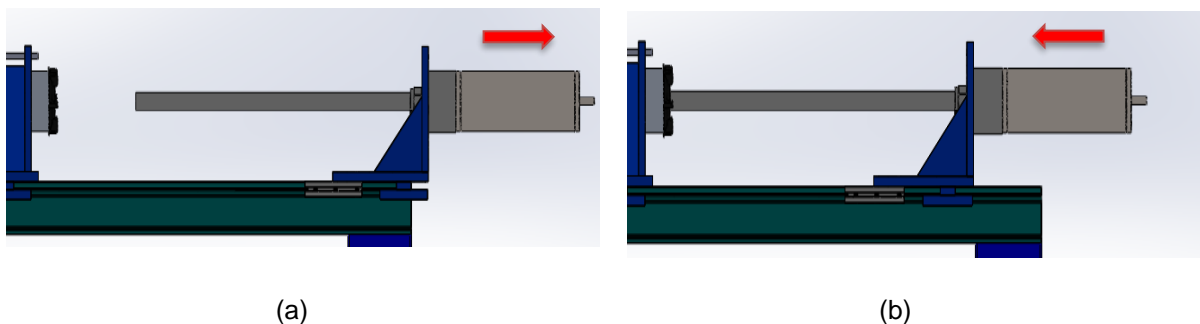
Pneumatic gun assembly: (a) Projectile exchange position; (b) shooting position.
